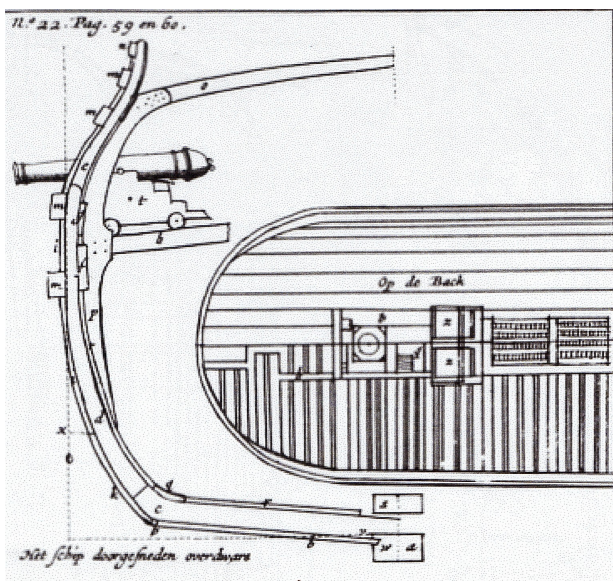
Cross-section of a one tier gun mounting on 17<sup>th</sup> century ships. Guns were below upper deck on orlop deck. Witsen excerpt of plate XLIII
